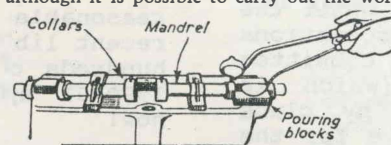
Re-metalling Ford main bearings in the crankcase with the re-metalling fixture in place.
